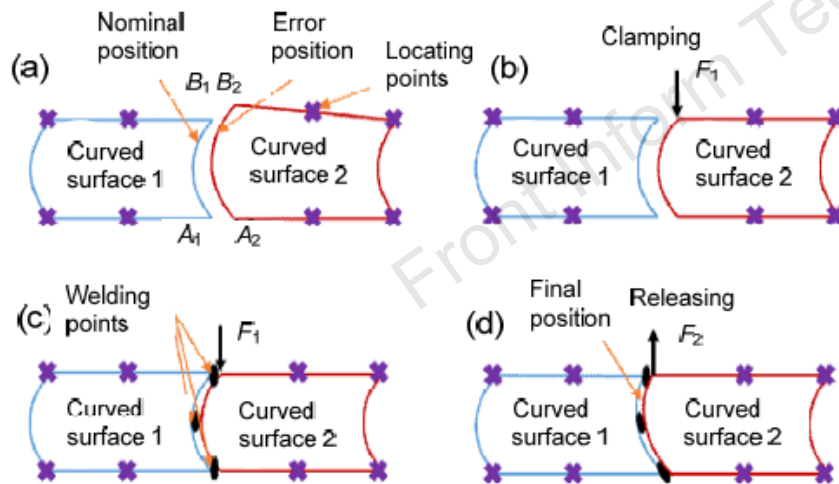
Four steps of a compliant assembly process: (a) locating process; (b) clamping process; (c) welding process; (d) releasing process
